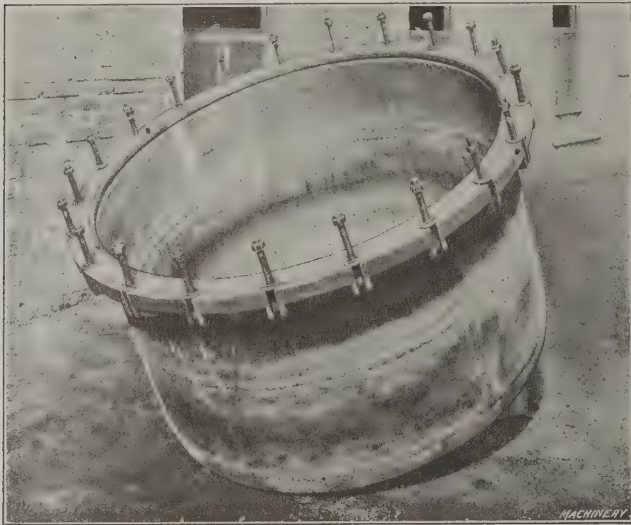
Example of Welding Copper. Kettle is 5 feet 6 inches in Diameter, 31 inches deep and used under Pressure. All Seams are welded on Both Sides
